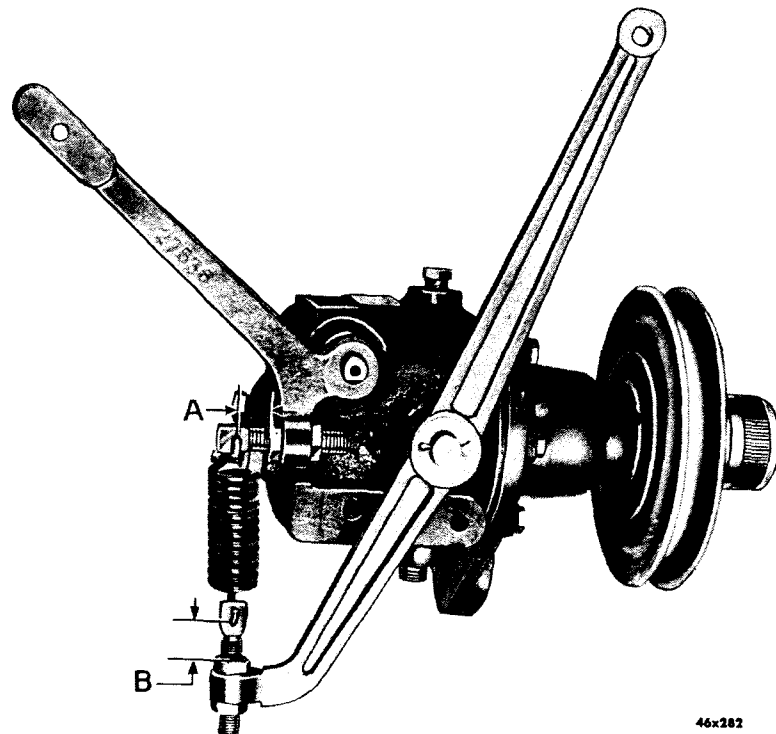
Hoof Mechanical Governor Lever Adjustments
